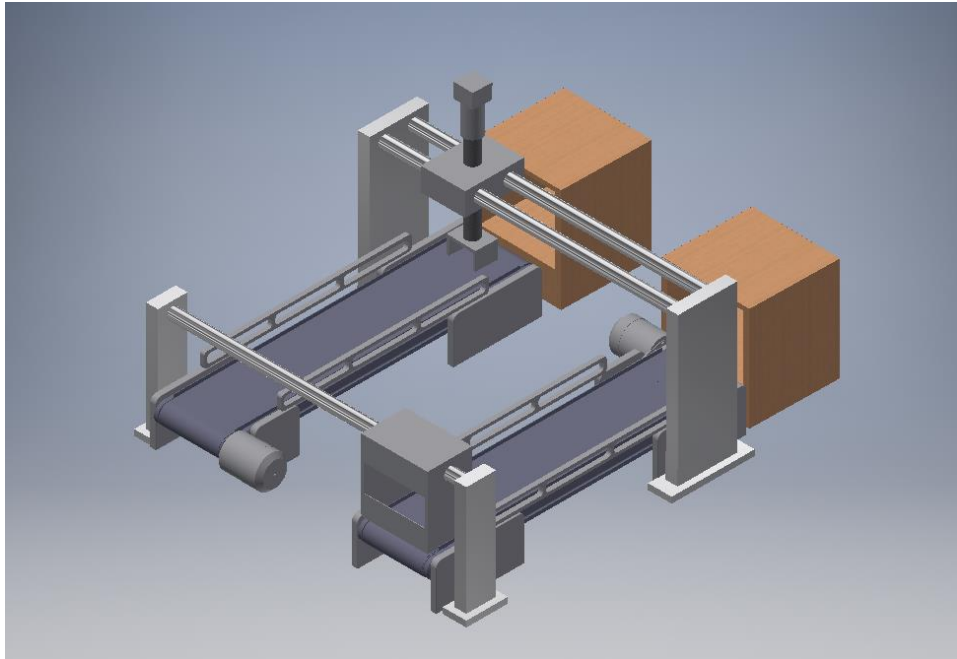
Prototype design of the machine in AutoCad Inventor. Side view
